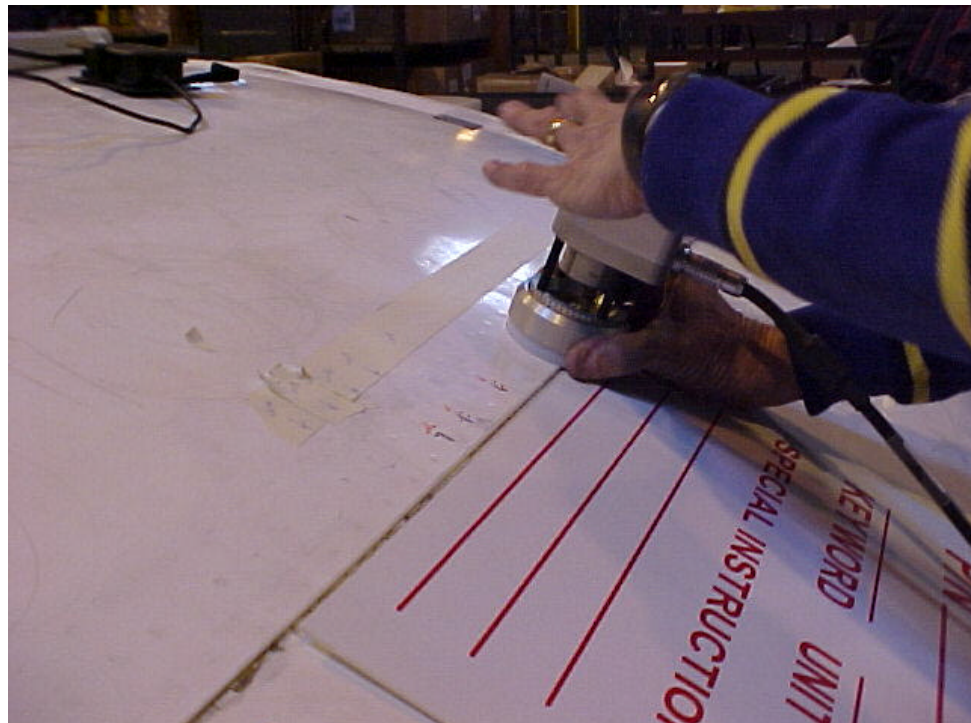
Photograph of Rivet Check inspection, showing close-up of probe head during inspection.
